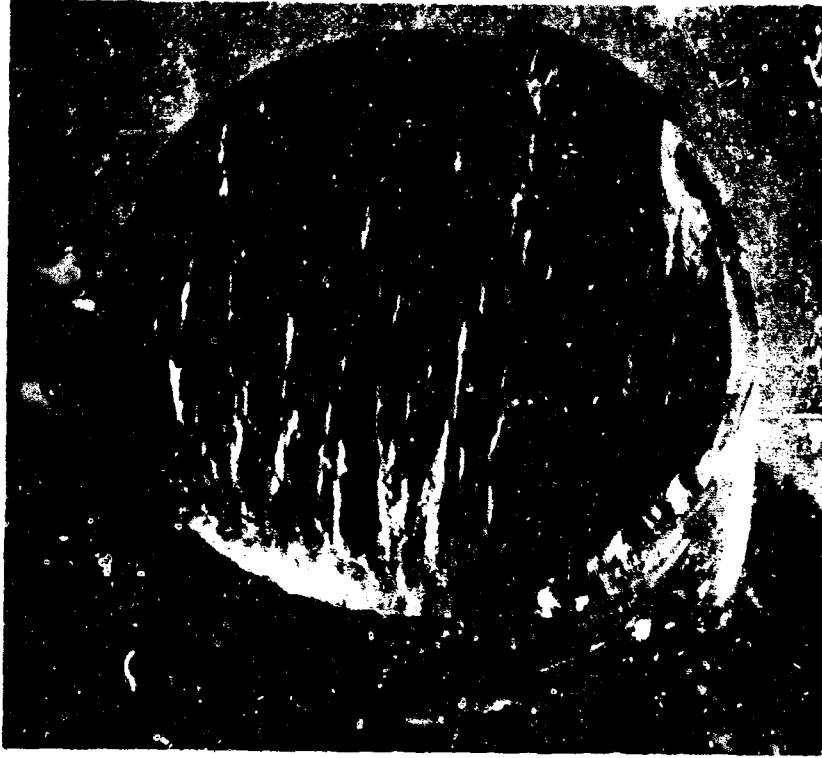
Shear-Type Fracture Exhibited by Many of the Bolts
